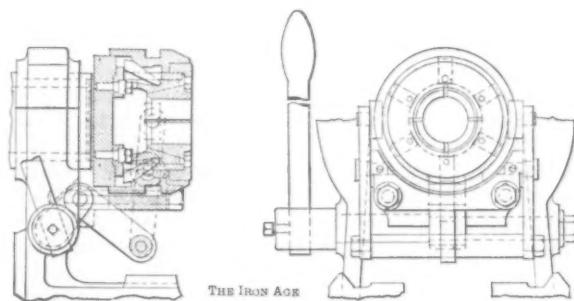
Chuck for Flat Turret Lathe (Ward).
